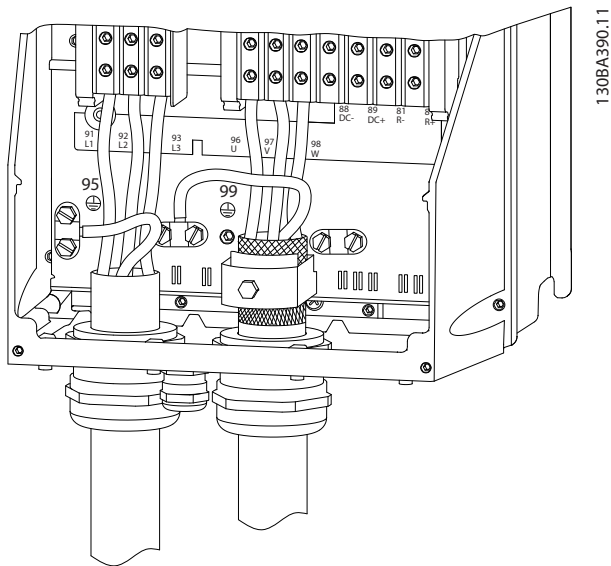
Motor, Mains and Earth Wiring for B-Frame Sizes and Above Using Shielded Cable
